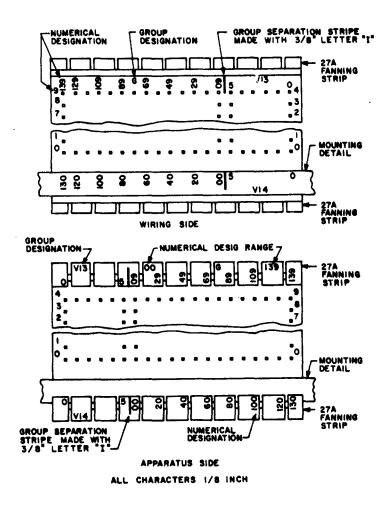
Terminal Strips—251 and Similar Types With Mounting Detail Below the Terminal Strip and Provided With 27- and Similar-Type Fanning Strips
